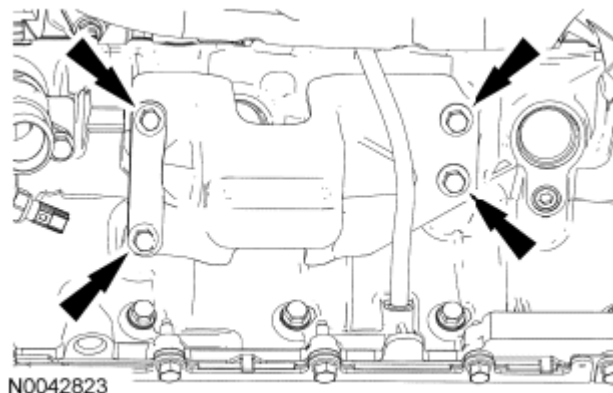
Locating LH Engine Support Insulator Bracket And Bolts
